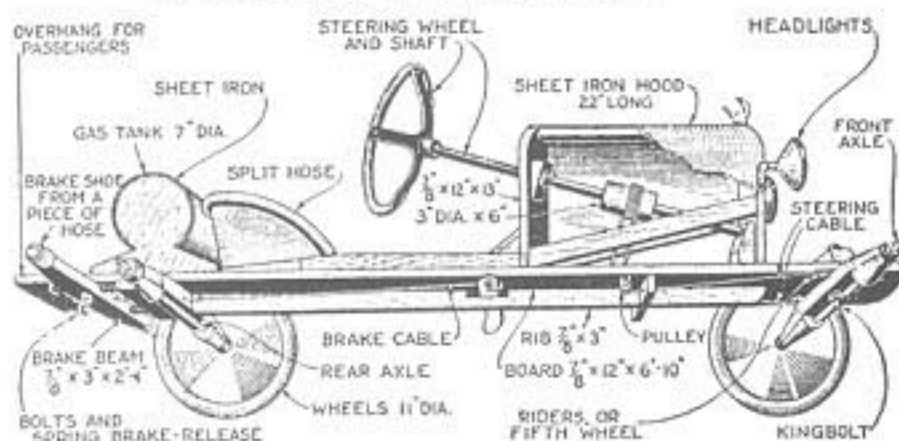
Side view of the coaster. To make the brake construction clearer, the pedal has been shown as if it were at the left instead of the right side.
